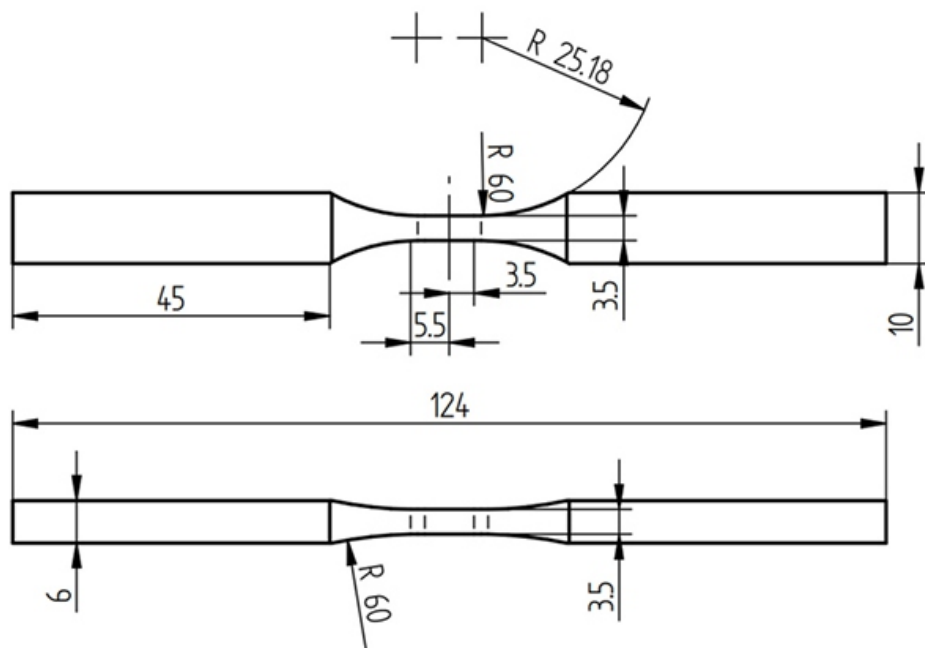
Geometry of the milled fatigue specimens before sample preparation for nanoindentation.
